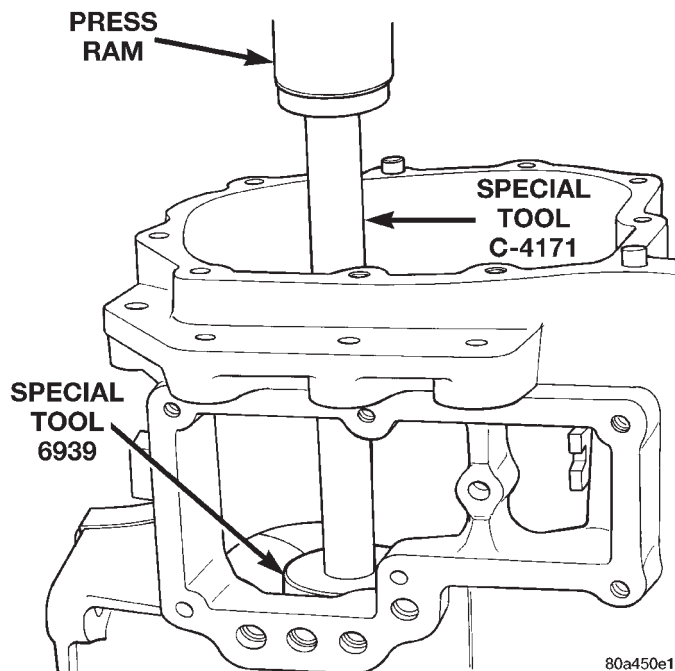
Install Intermediate Shaft Bearing Front Bearing Cup
